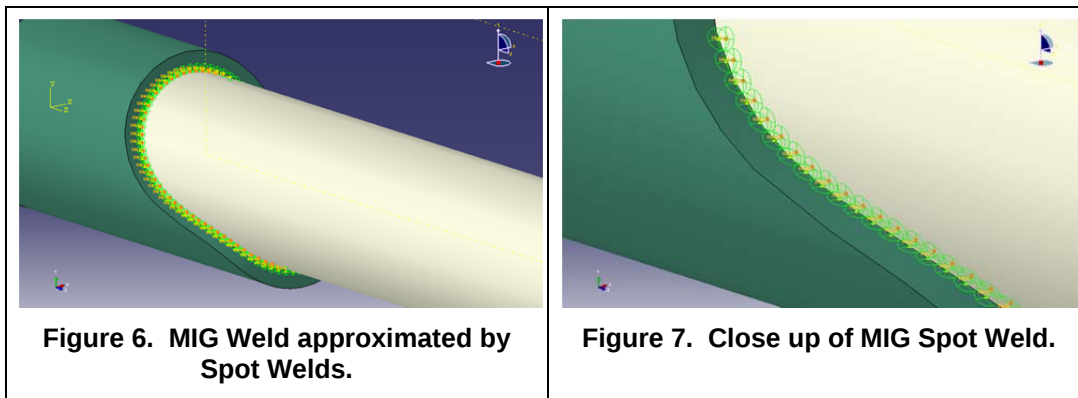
MIG Weld approximated by Spot Welds.
